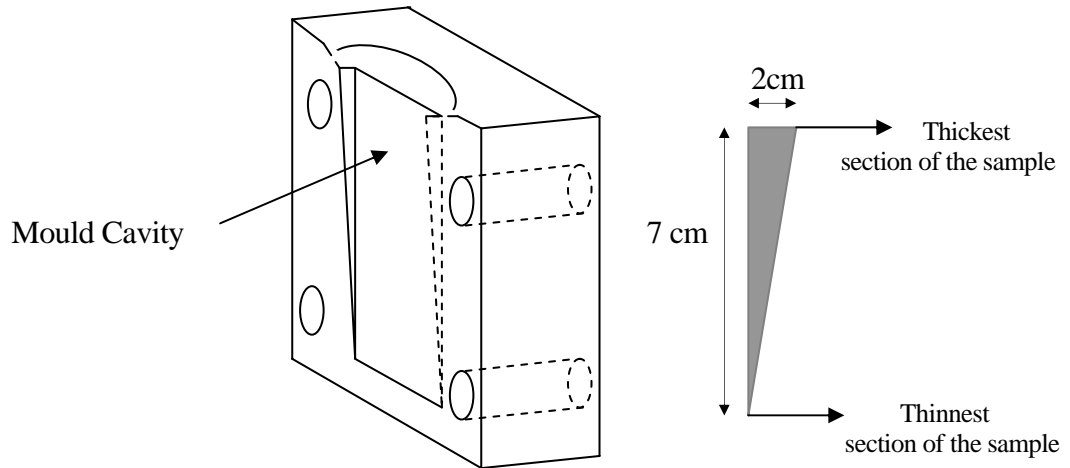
Schematic view of the half of the wedge-shaped copper mould and the dimensions of the cast sample.
